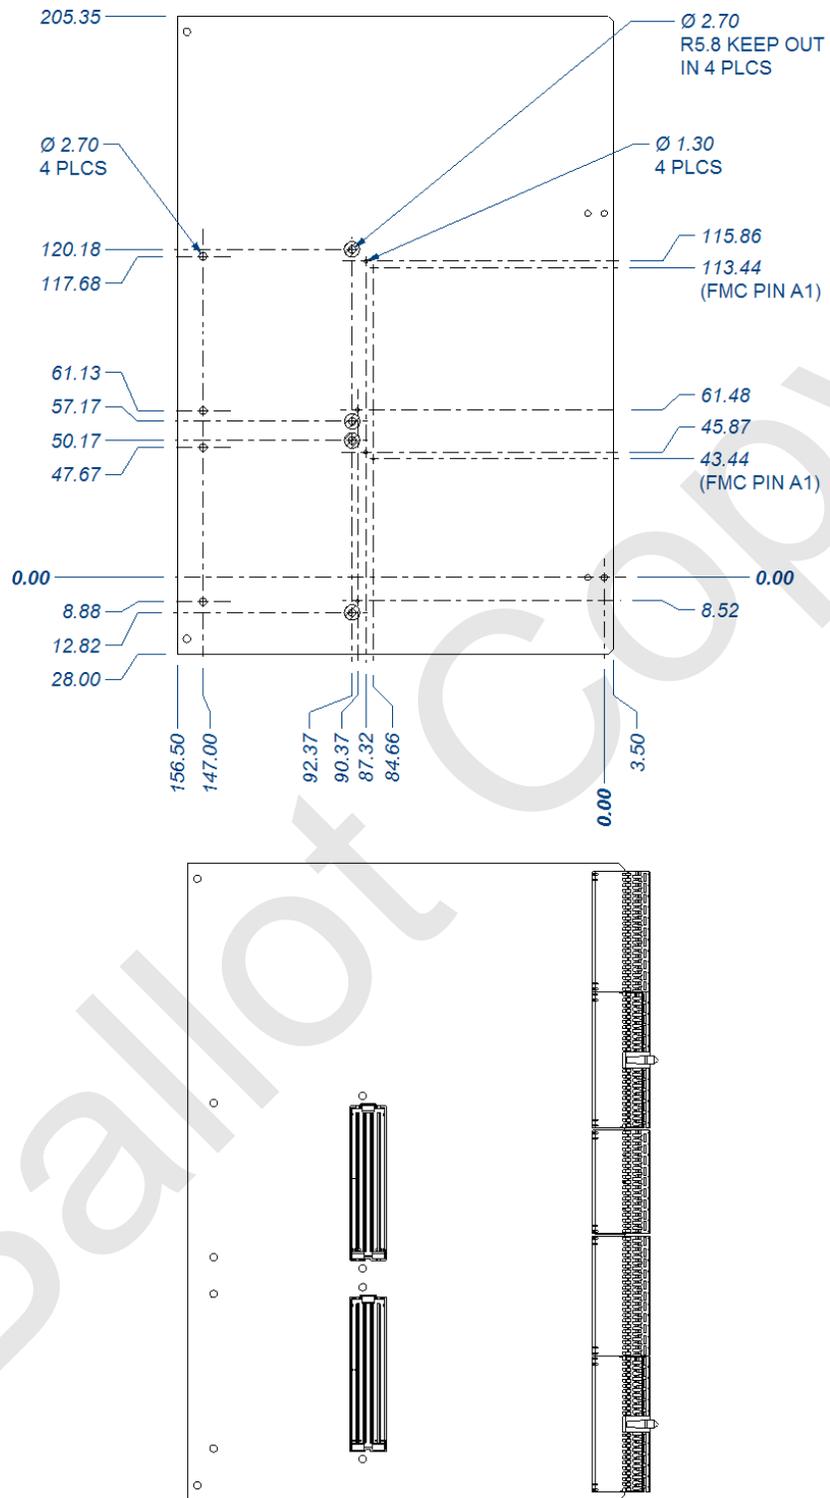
Dimensions of cPCI carrier card example with two FMC sites
